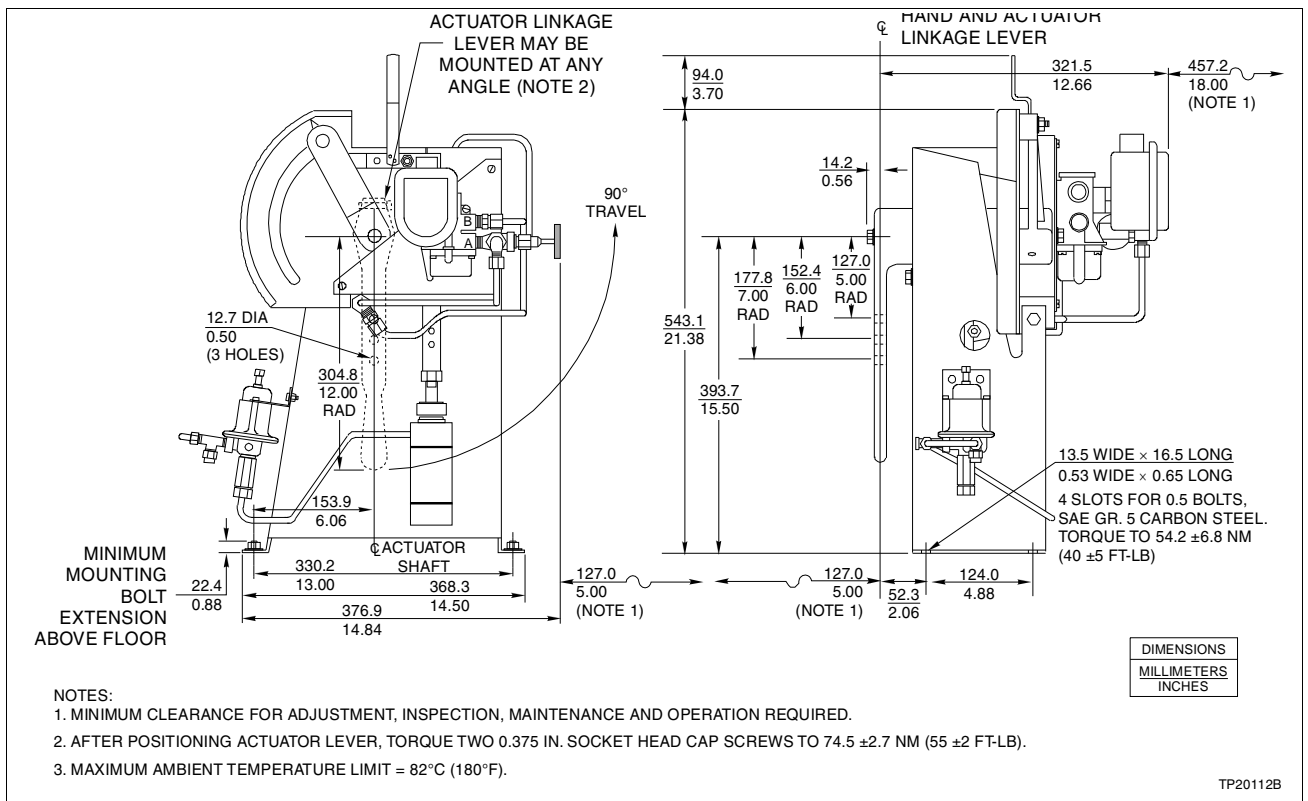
Type UP1 Actuator with Solenoid Valve and Air Failure Lock
